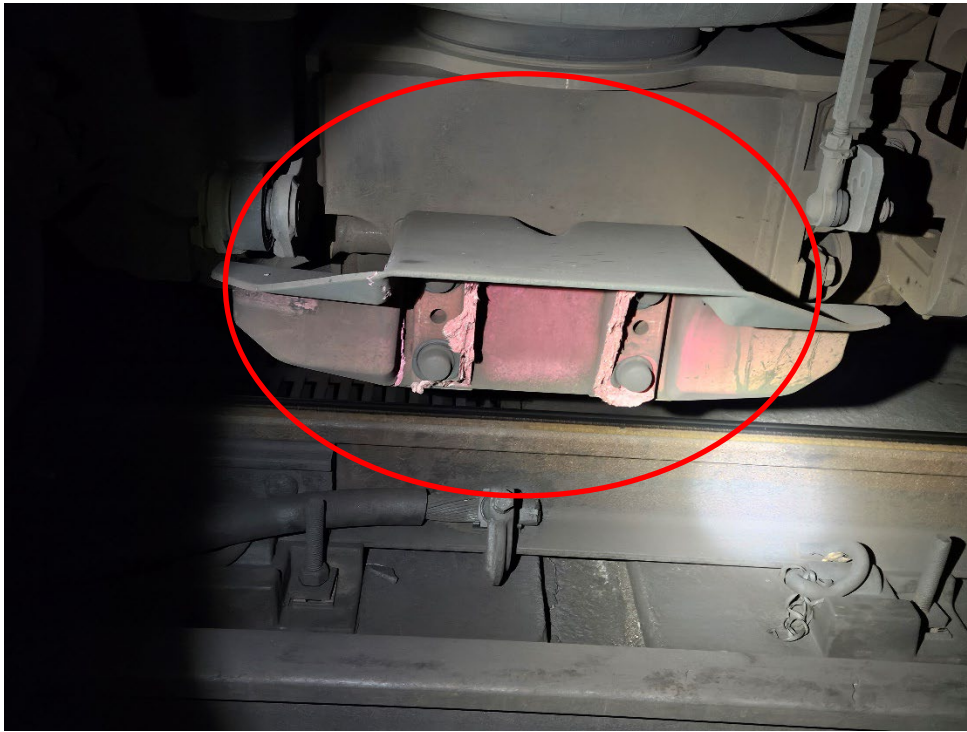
The above photo shows Car 7663 mounting bolts, fiberglass arc shield, and clean break, indicating Foreign Object Damage on the rear truck at the #4 collector shoe assembly position.
